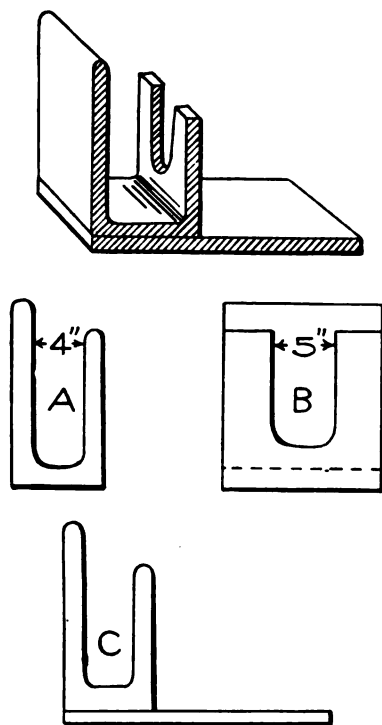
TOOL FOR BENDING ARMS UNDER THE STEAM HAMMER.
